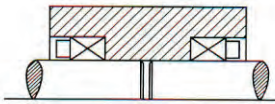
Connection of two shafts using one GSN 7012 locking assembly per shaft
